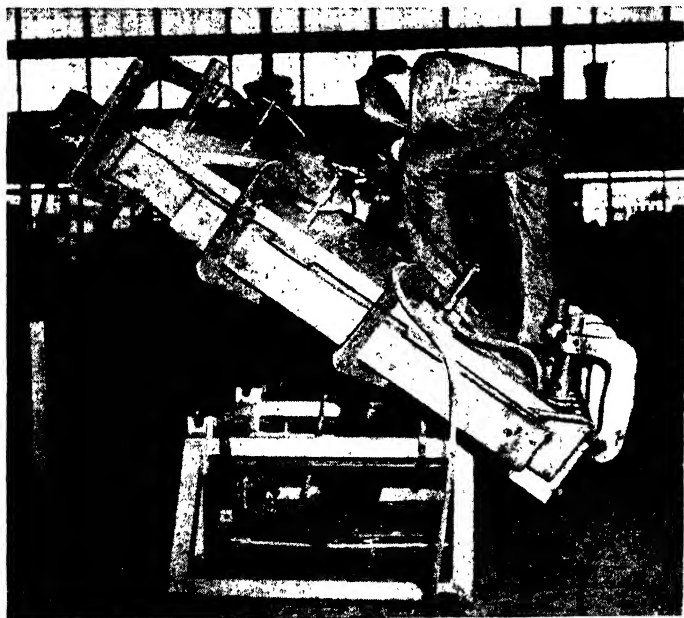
The special setups, sequences, controlled procedures, and teamwork of these two welding operators require training. (Courtesy of R. G. LeTourneau, Inc.)
